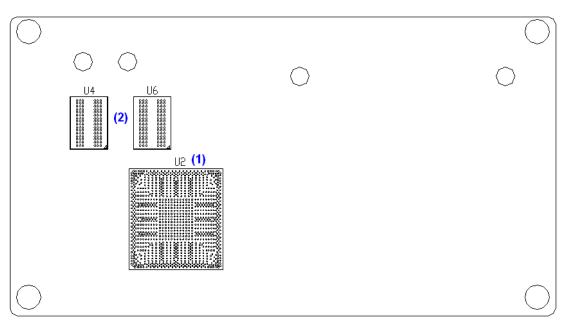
Jumpers and Connectors Location- Board Bottom
